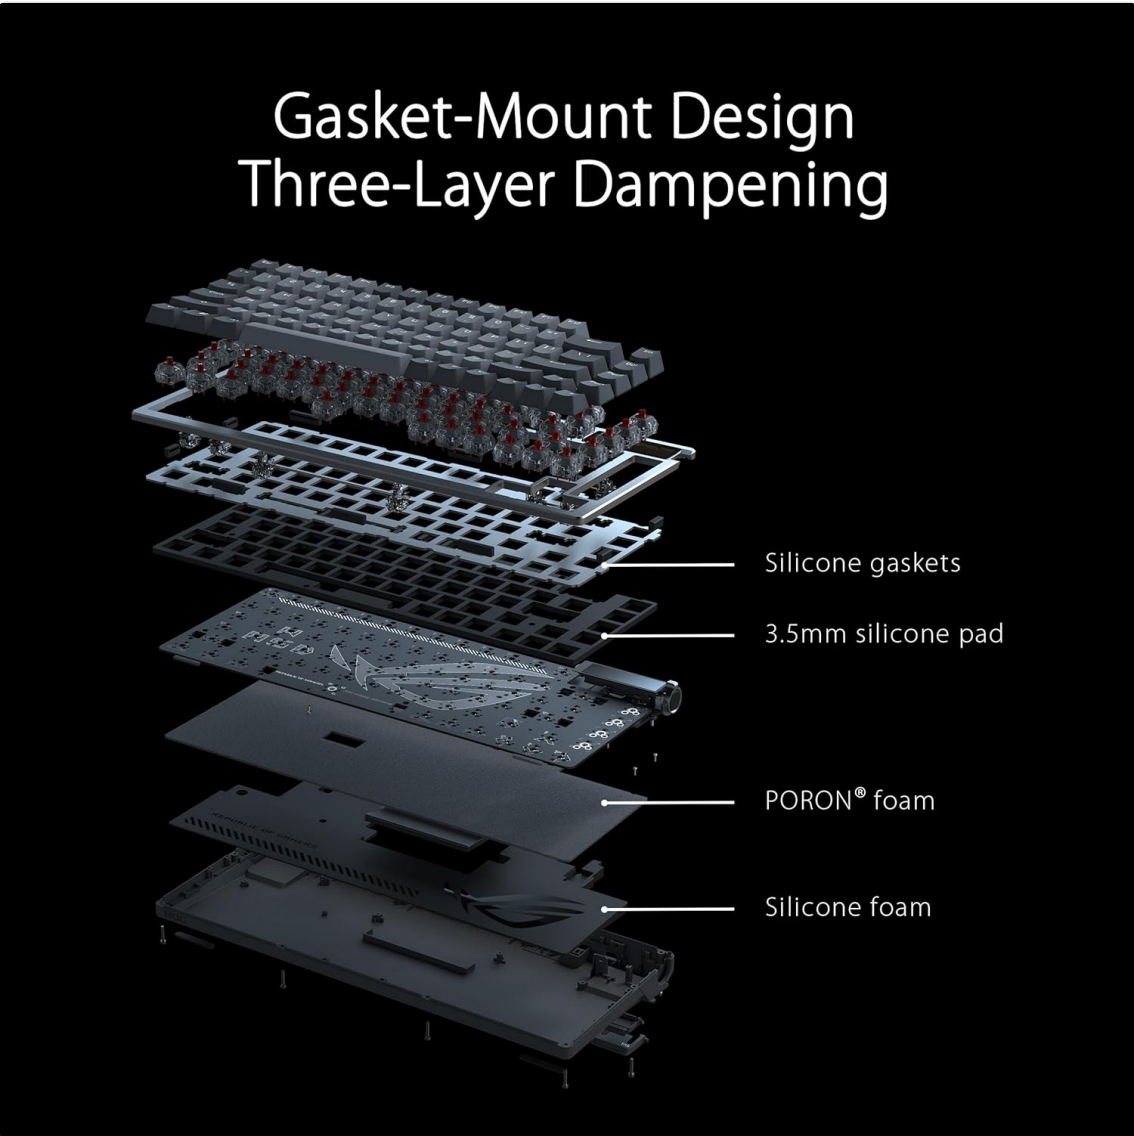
Gasket-Mount Design and Three-Layer Dampening.
